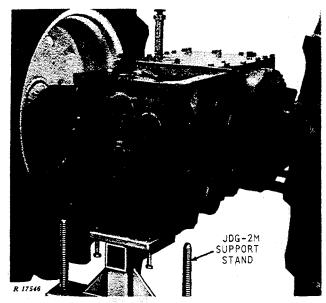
Rear Section of Tractor After Separation (Tractor without Rockshaft)
